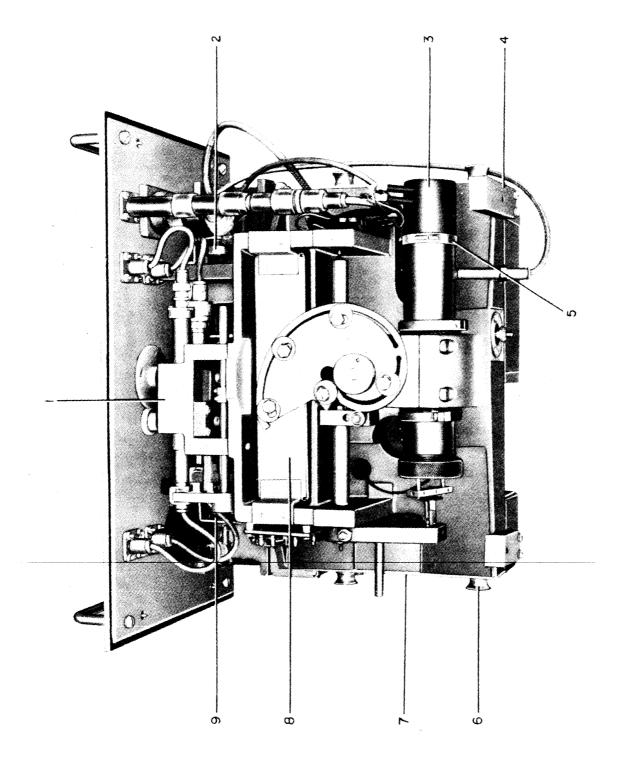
R-f Tuning Unit and Panel Assembly, Bott m View
